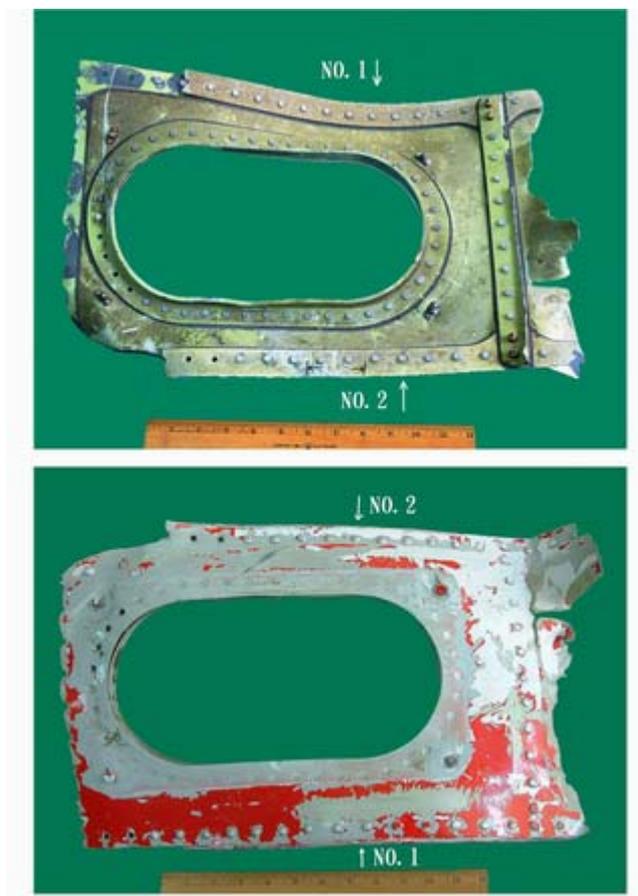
Wreckage with suspected fatigue crack
